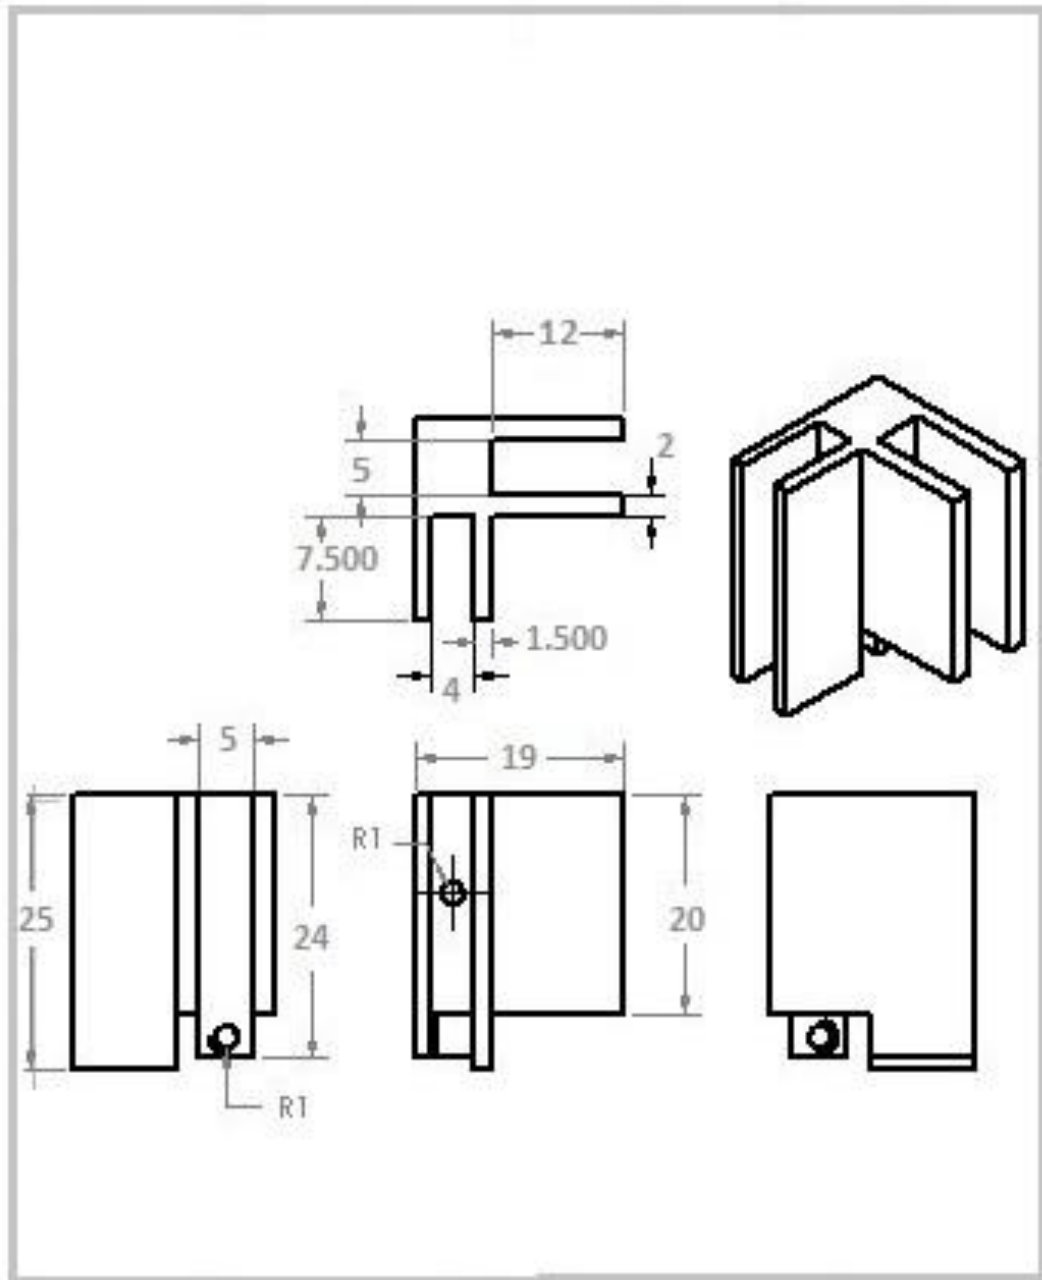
Technical drawing of the moving part 02 of the external nozzle
